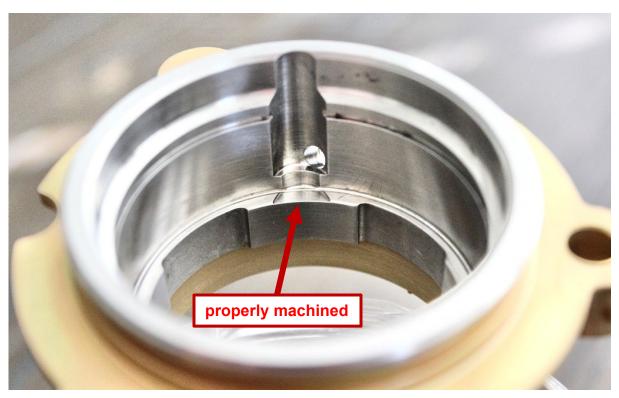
Improper Machining of Aft Cap Scallop (sheet 1 of 2)
